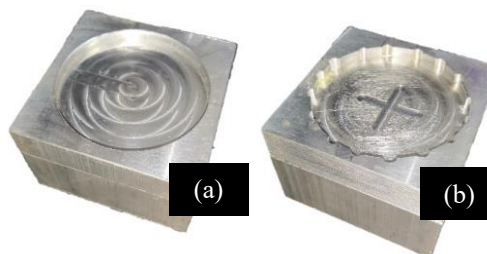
Two types of die geometry with (a) and without (b) additional machining.
